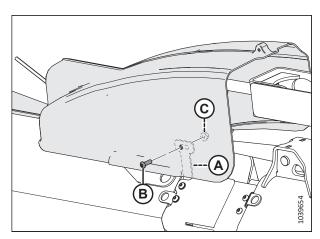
Right Outboard Linkage Cover – View from Front of Header
